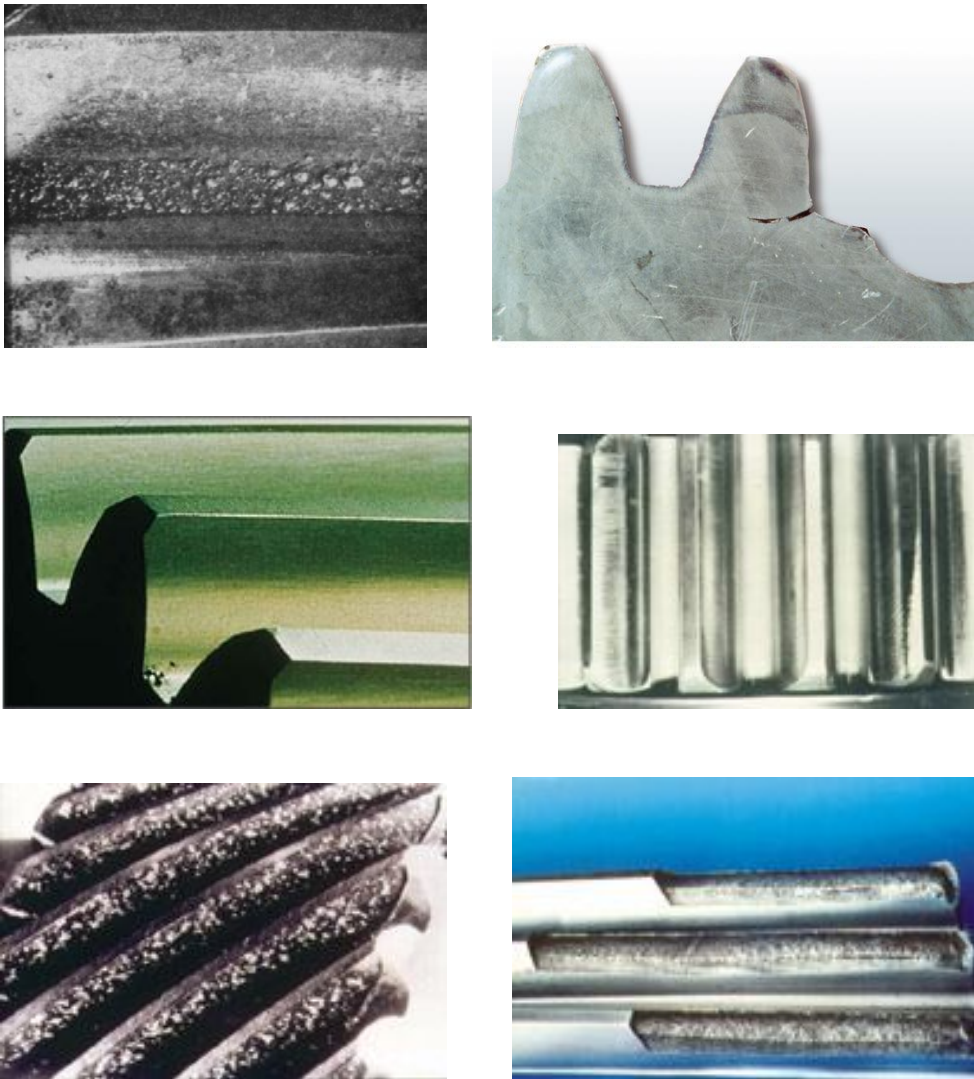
Illustration of different modes of failure [Machinery Lubrication]
